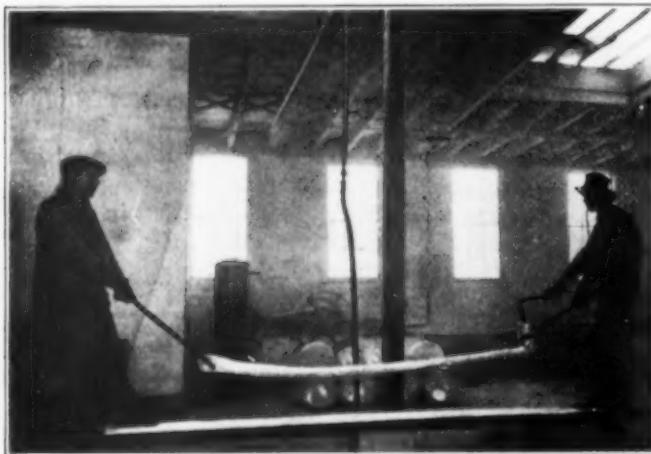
DRAWING TUBE ON CHANNEL IRON BENCH
